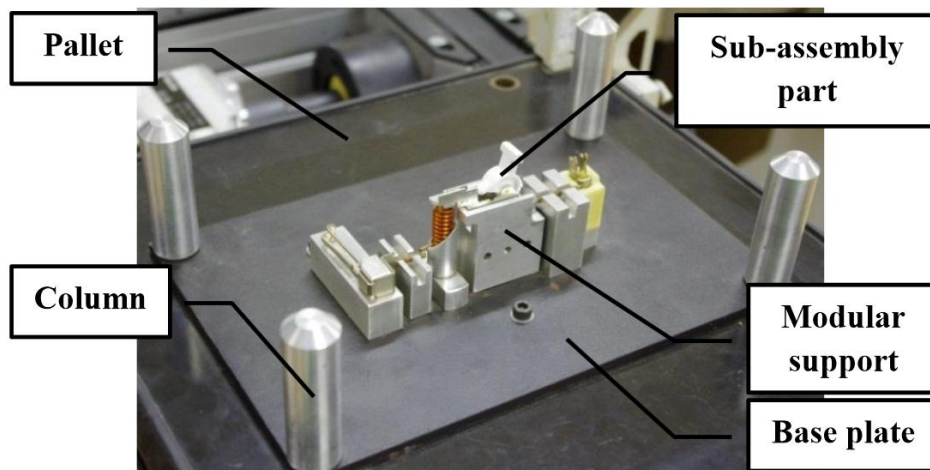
Photograph of Pallet with components in the fixtures (Kruger, 2013, p.29).
